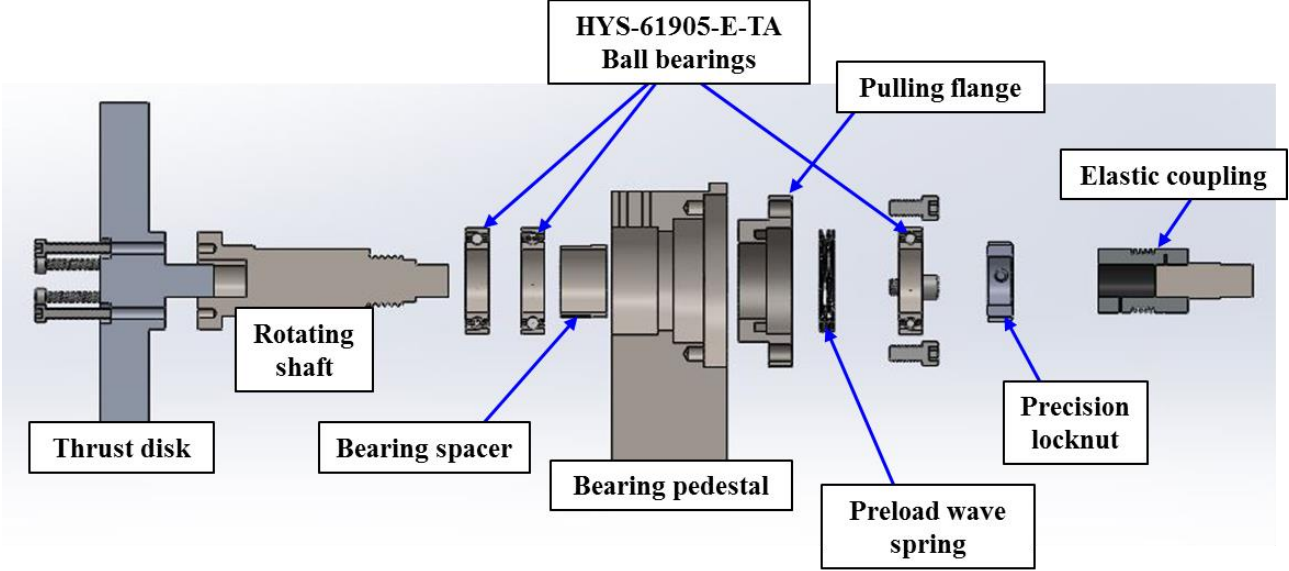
Exploded cut view of a bearing pedestal and rotating shaft assembly.
